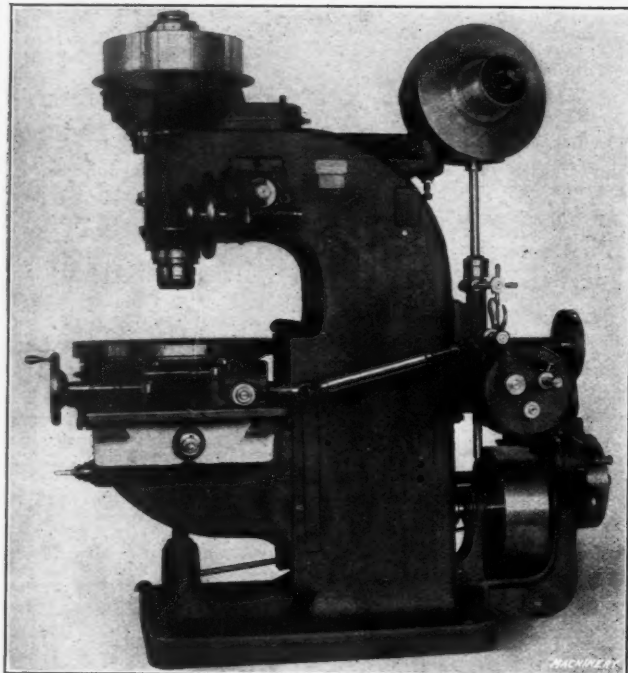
Special Type of Model C Becker Vertical Milling Machine on which the Fixtures are used
